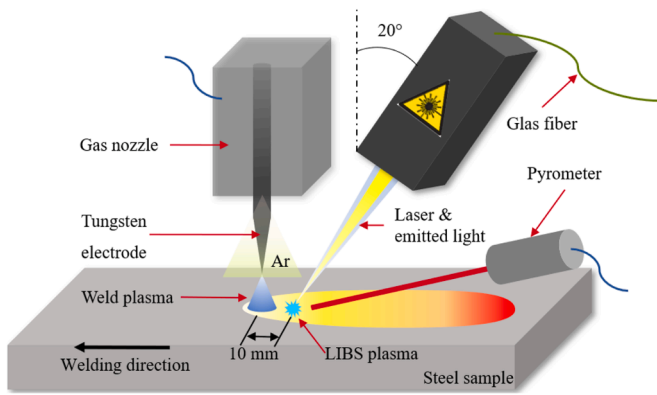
Experimental sketch of the LIBS and weld setup.
